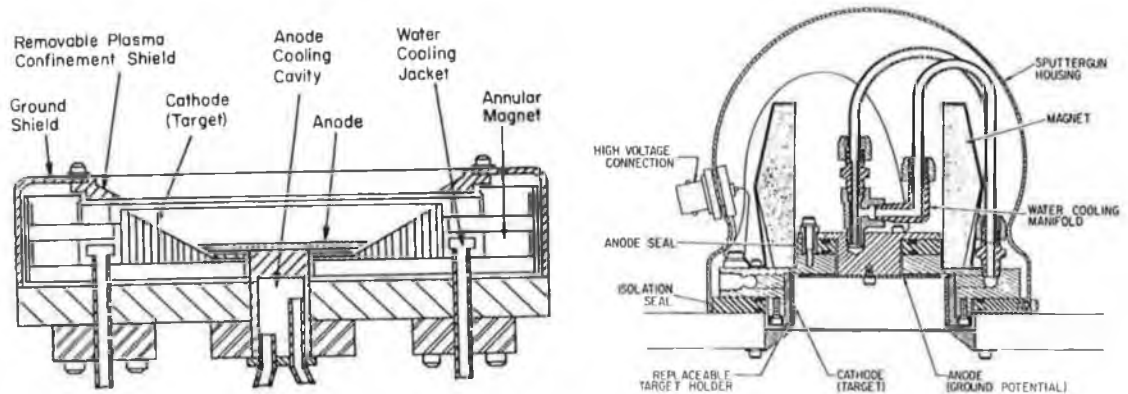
¹⁰ Cross sectional view of S-gun and Sputter gun magnetron designs.
